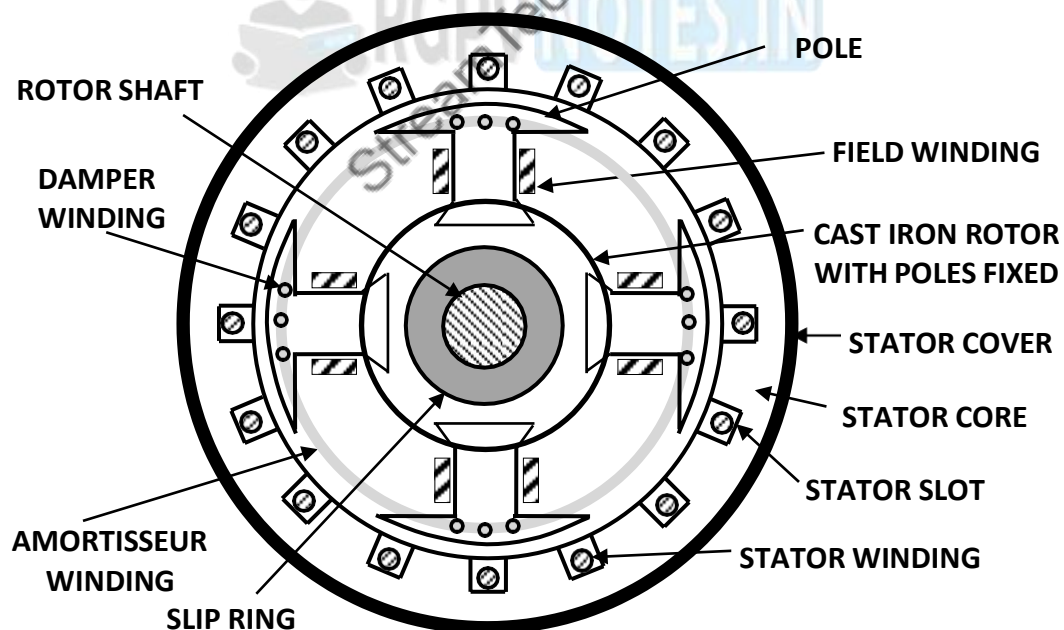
Constructional details of a synchronous machine with amortisseur winding
